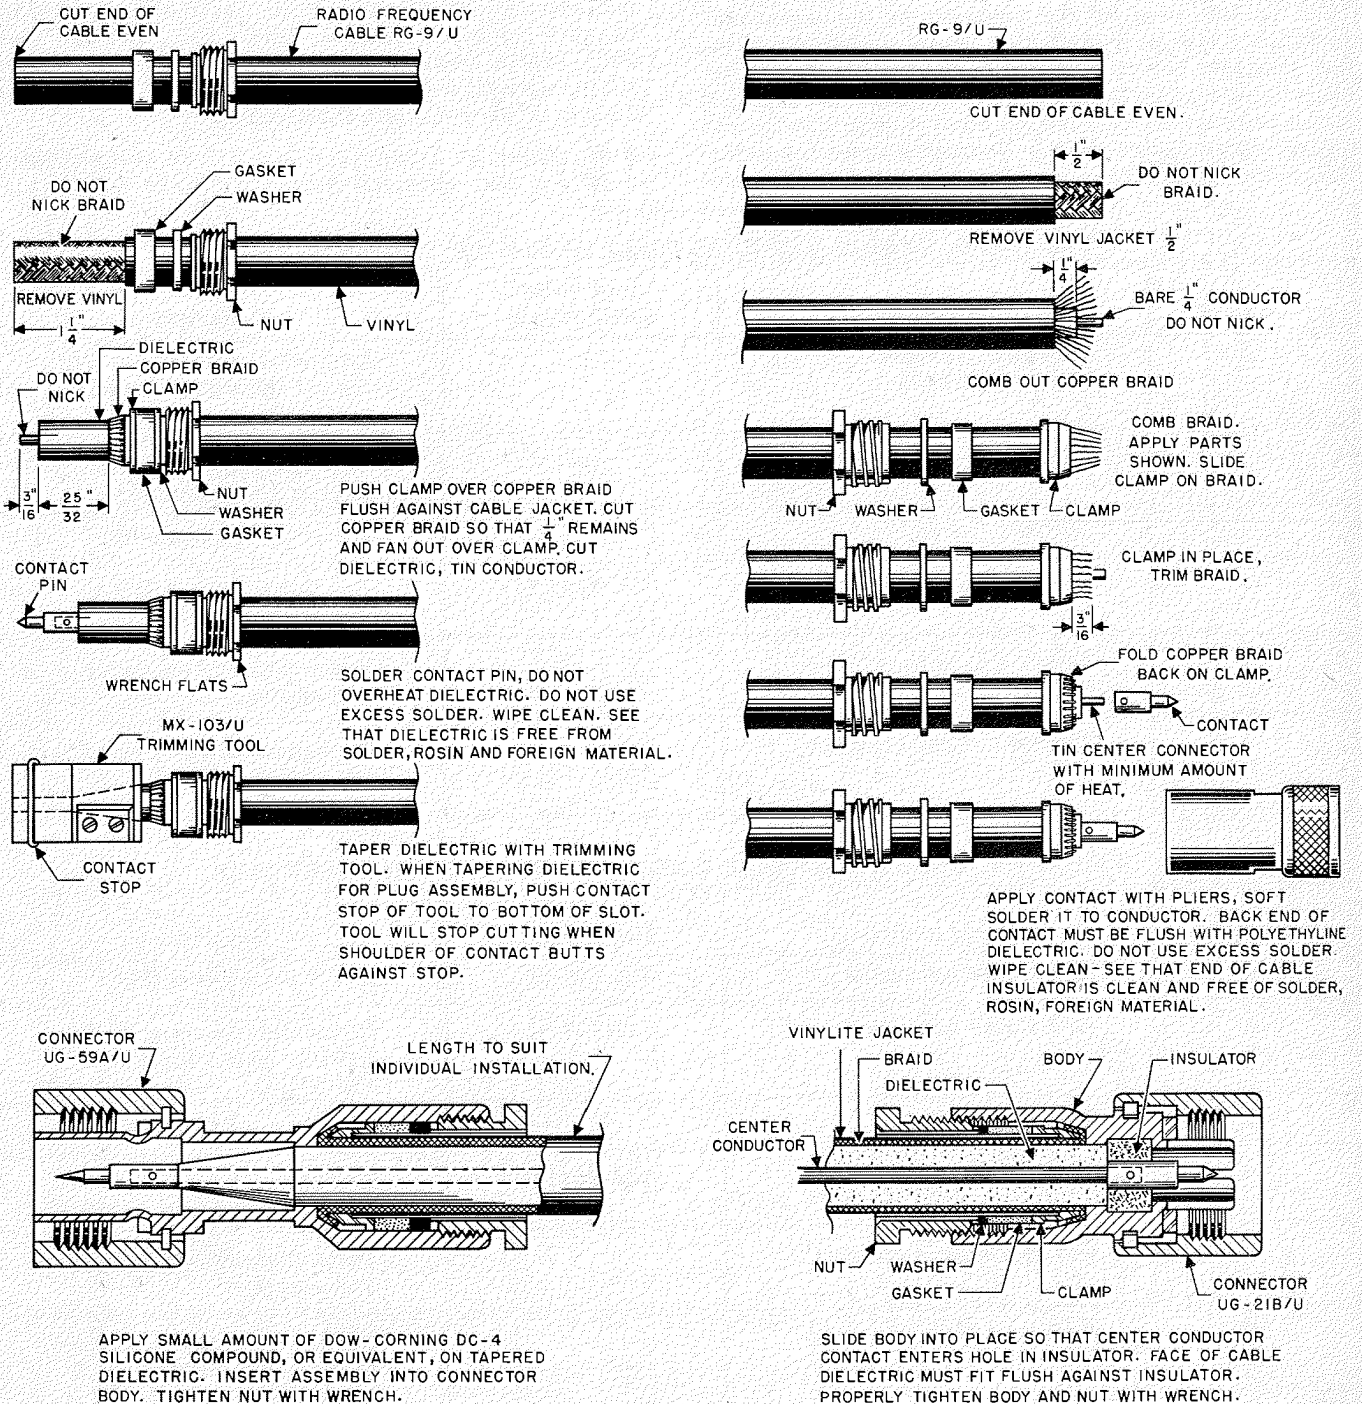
Radio Receiver R-361/GR, Antenna Transfer Cable Assembly
